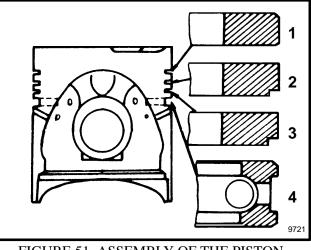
ASSEMBLY OF THE PISTON RINGS
